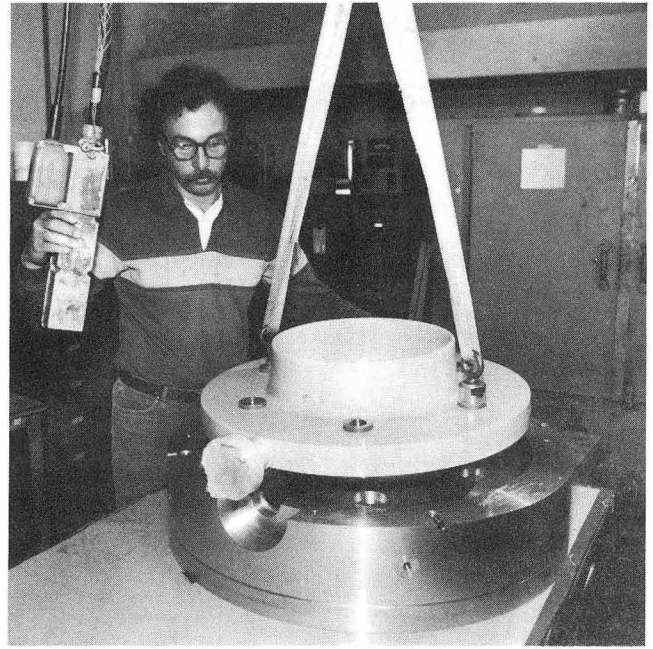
Finished Insulator Being Removed from Casting Mold
